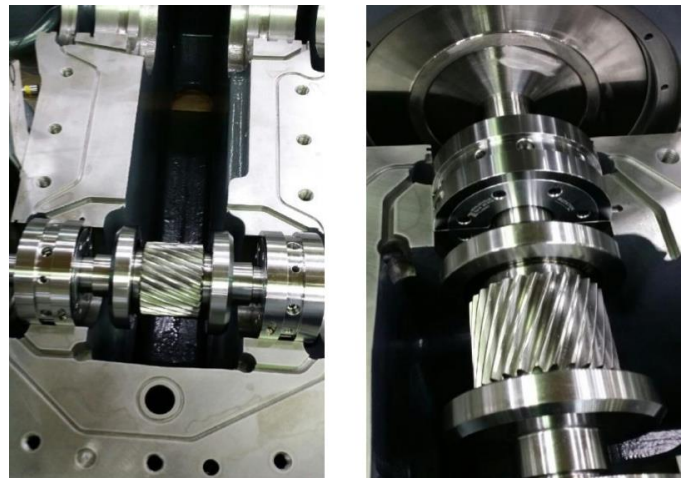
Example of pinion gear-shaft with thrust collars on either side.
